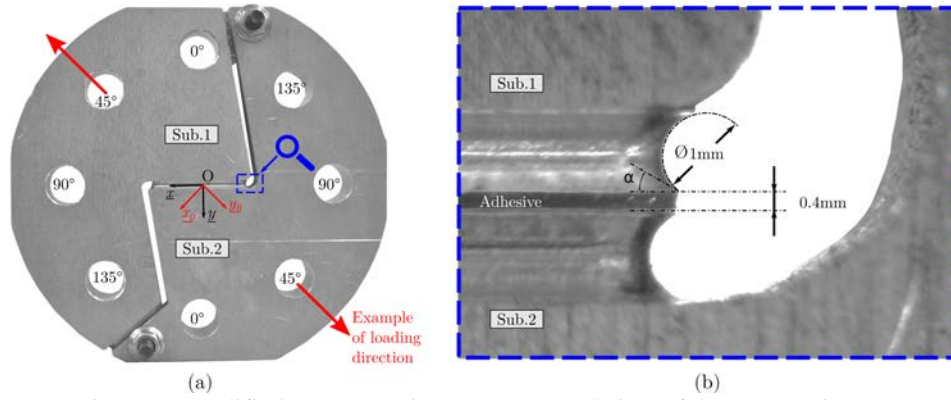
Modified Arcan specimen. (a) General view of the test specimen. (b) Zoom on the local geometry of the beaks.
